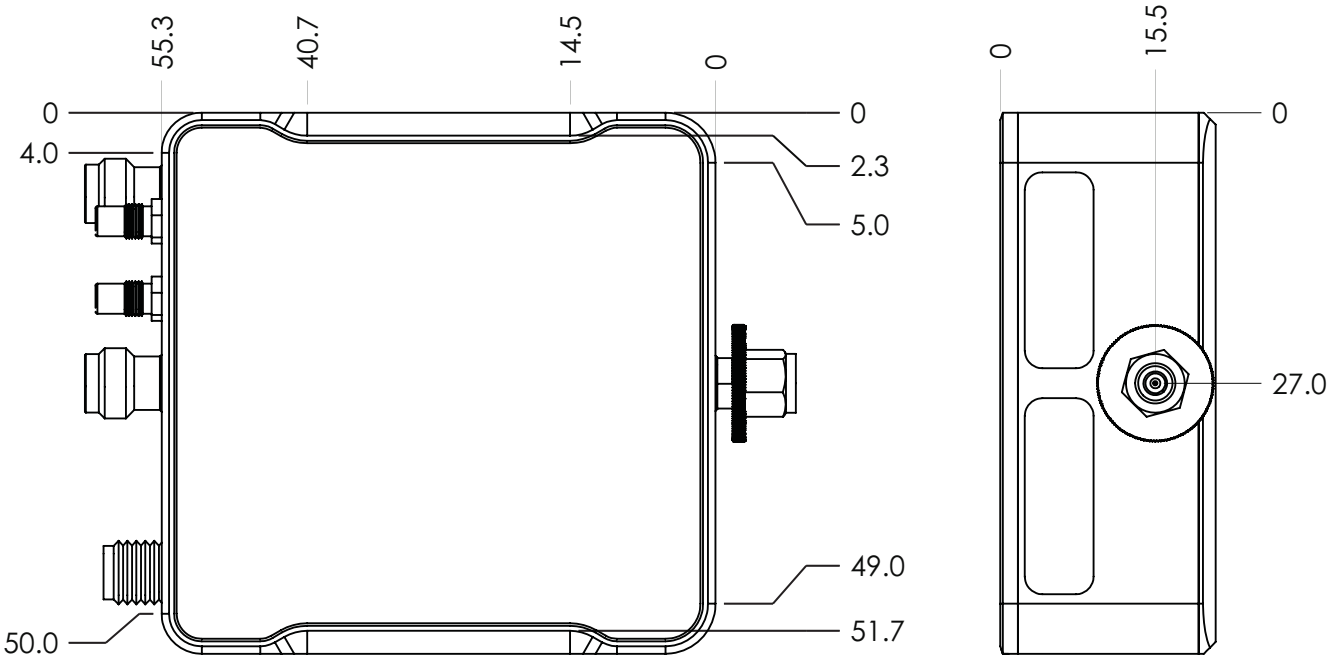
3743A Millimeter-Wave Module Outline Drawing (1 of 2)
